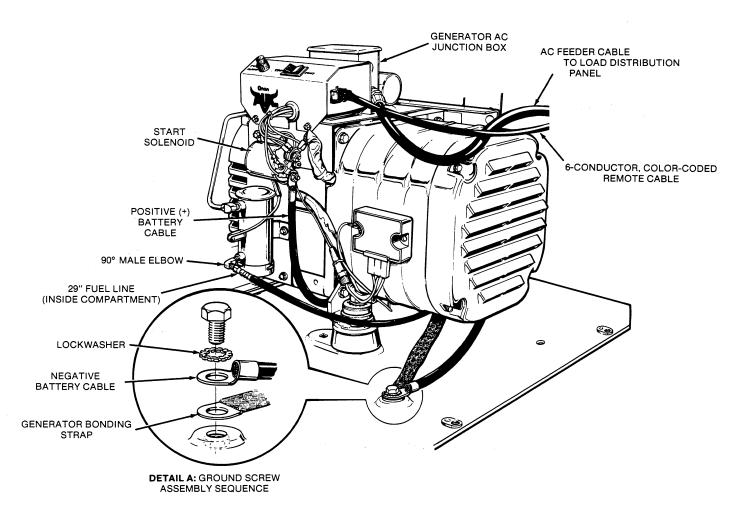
BATTERY AND GROUND CABLE CONNECTIONS FOR SIDE-MOUNTED INSTALLATIONS ONLY
